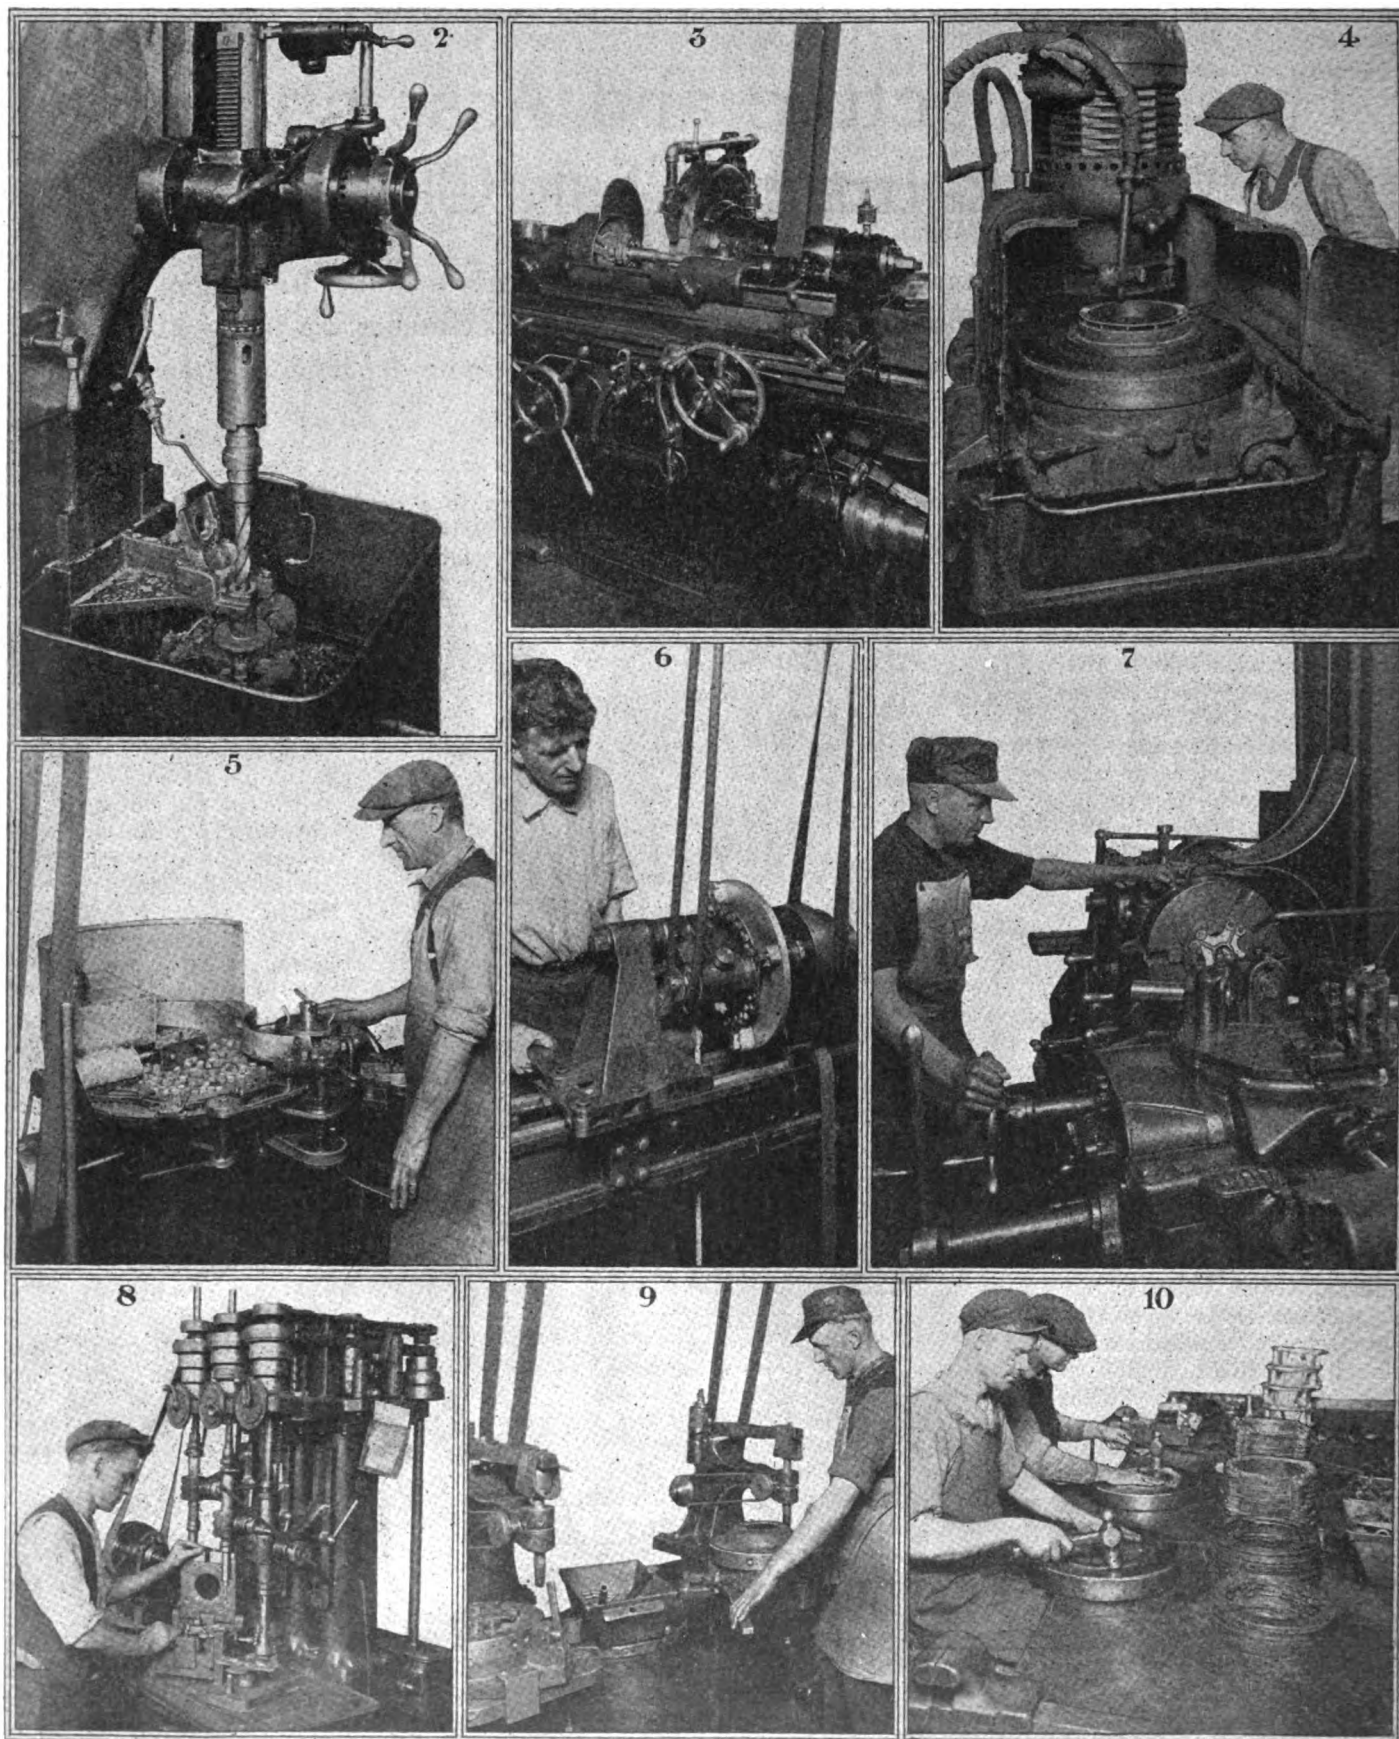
The center bore on the clutch hub is drilled and reamed on a Foote-Burt radial. Fig. 3—Finish grinding outside diameter of clutch hub on Norton grinding machine. Work is held on arbor pressed into hub. Fig. 4—Facing the clutch cover on a Blanchard grinder to assure a good seating contact against the face of the flywheel. Fig. 5—Automatic machine for inserting the corks in the driving disks for the Hudson-Essex clutches. Fig. 6—Straddle slicing machine which slices off ends of corks on both sides of disks, leaving slight amount projecting for frictional contact. Fig. 7—Boring and reaming clutch spider on Pratt & Whitney machine. Fig. 8—Three-spindle Sipp used for drilling and spot-facing stud holes in clutch spider. Fig. 9—Automatic riveter which rivets the driving pins to the clutch cover. Fig. 10—Straightening clutch plates to within .010 in. limit by peening.
